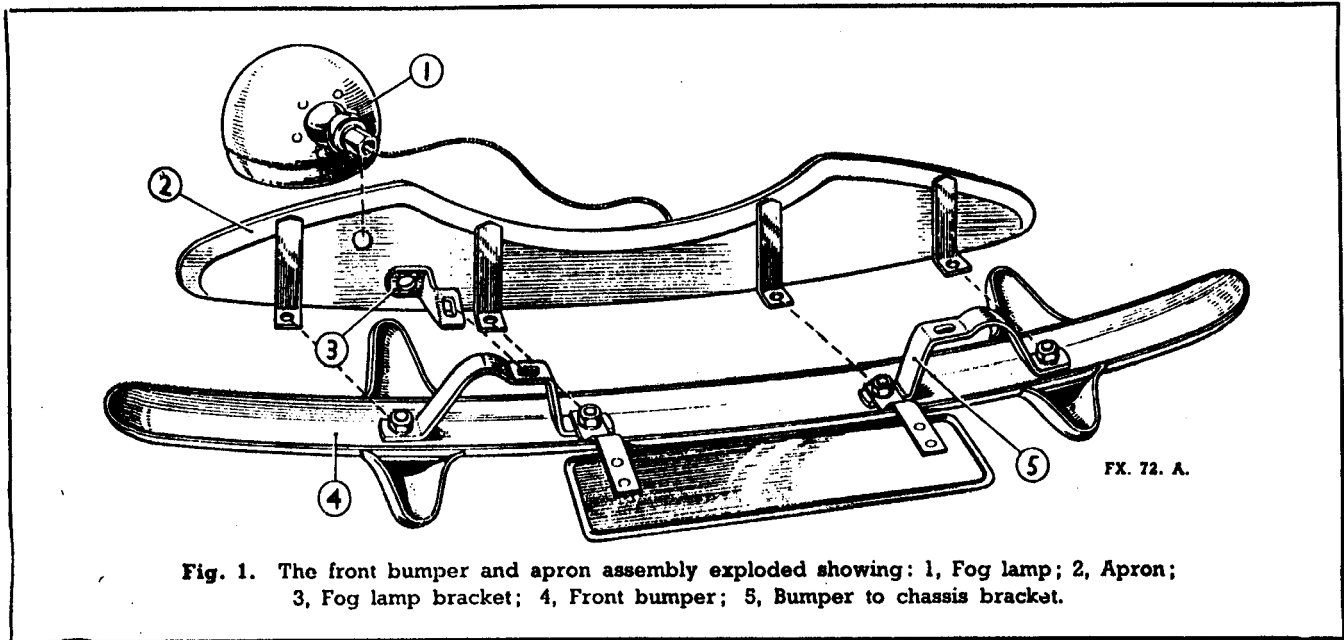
The front bumper and apron assembly exploded showing: 1, Fog lamp; 2, Apron; 3, Fog lamp bracket; 4, Front bumper; 5, Bumper to chassis bracket.
